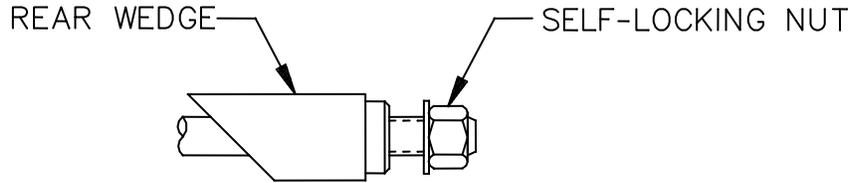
Screw retaining self-locking nut (corrosion resistant) details.
